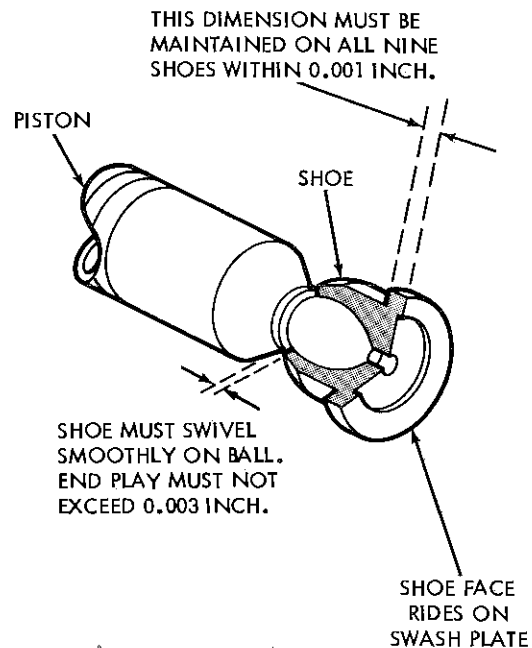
Piston and Shoe Subassembly Tolerances
